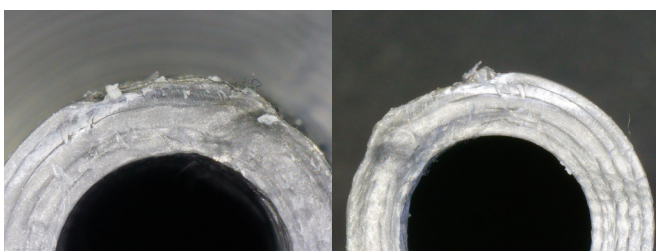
Cross-section mouthpiece ironed w/ 3mm/s
